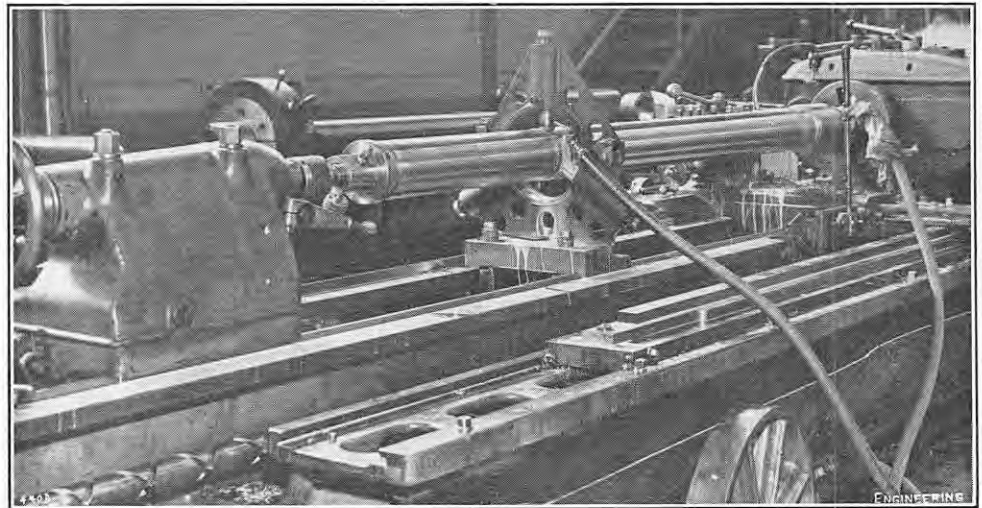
CORE TUBE BEING TURNED IN CONTOURING MACHINE.
